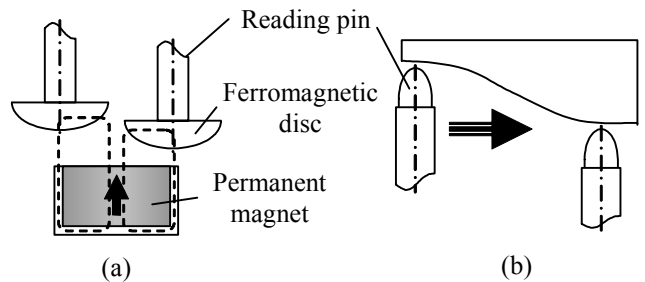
Clearing mechanisms for the reading pins. Magnetic principle (a) and mechanical principle (b).
